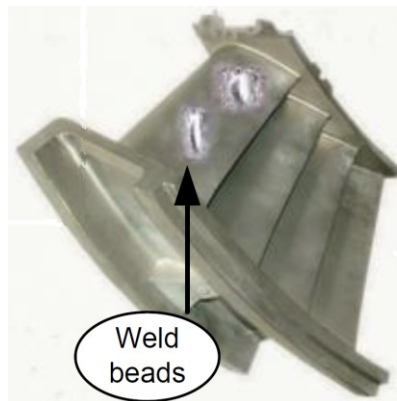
Damaged vane with small defects on its freeform surfaces
